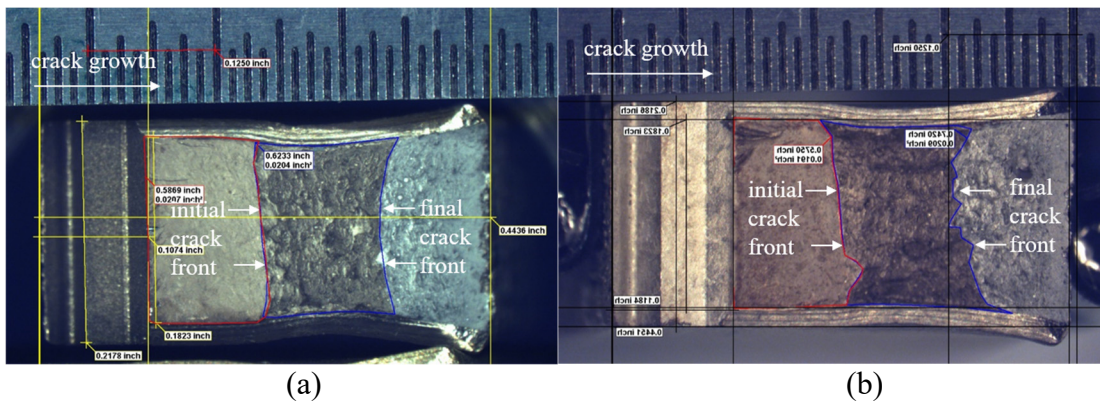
The fracture surfaces of the (a) TS-2 specimen and (b) TS-4 specimen.
